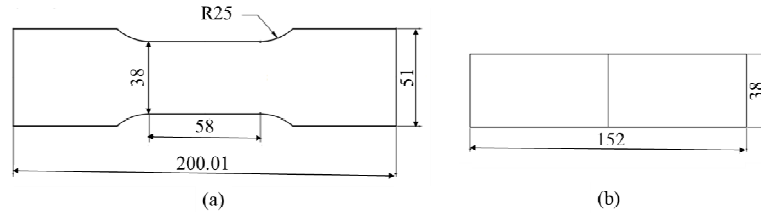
Dimensions of the mechanical testing specimens: (a) tensile strength and (b) bend test.
